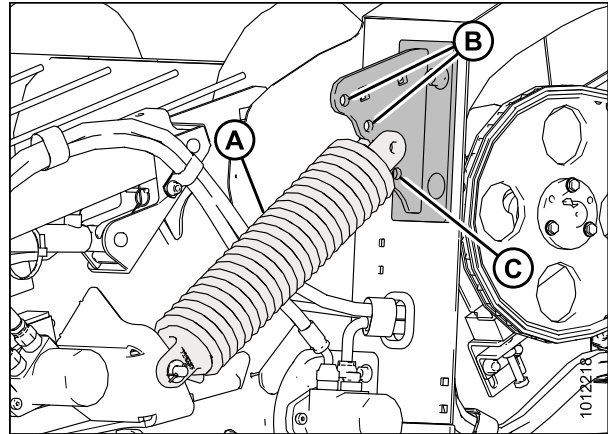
Left Side Anchor Shown – Right Side Opposite
